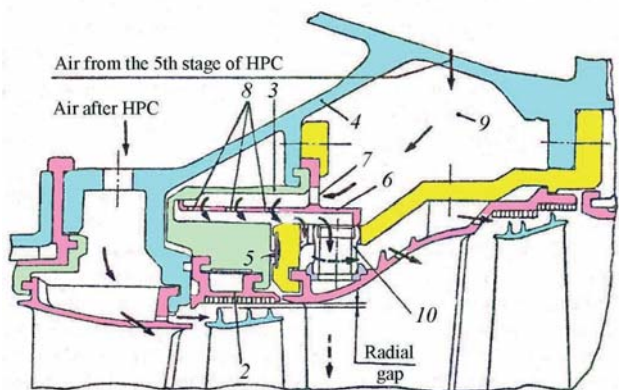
Design of the high- and low-pressure turbine housings of the UGT25000 engine
